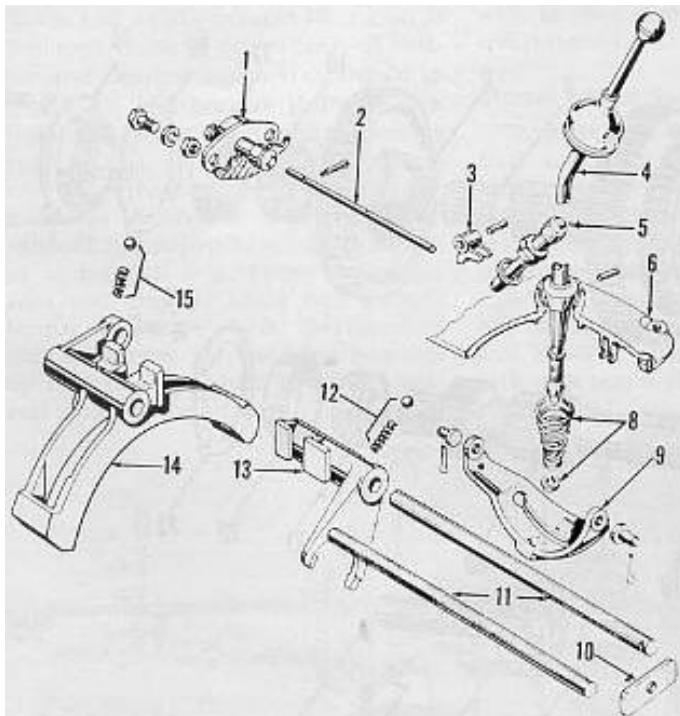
Gear shifter mechanism on models 2N-9N. Detailed changes were made in the design beginning with tractor serial 12500.
